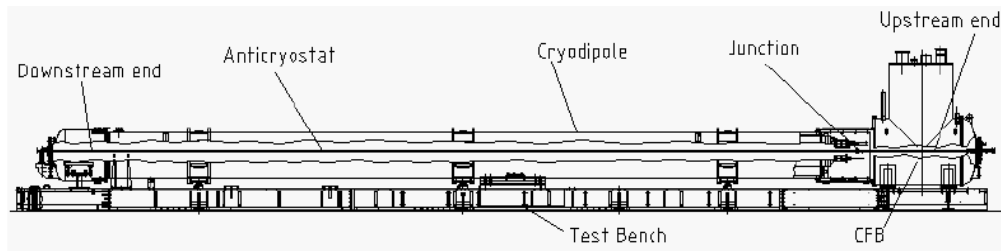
Layout of a cold test bench for dipole magnets equipped with anticryostats.
